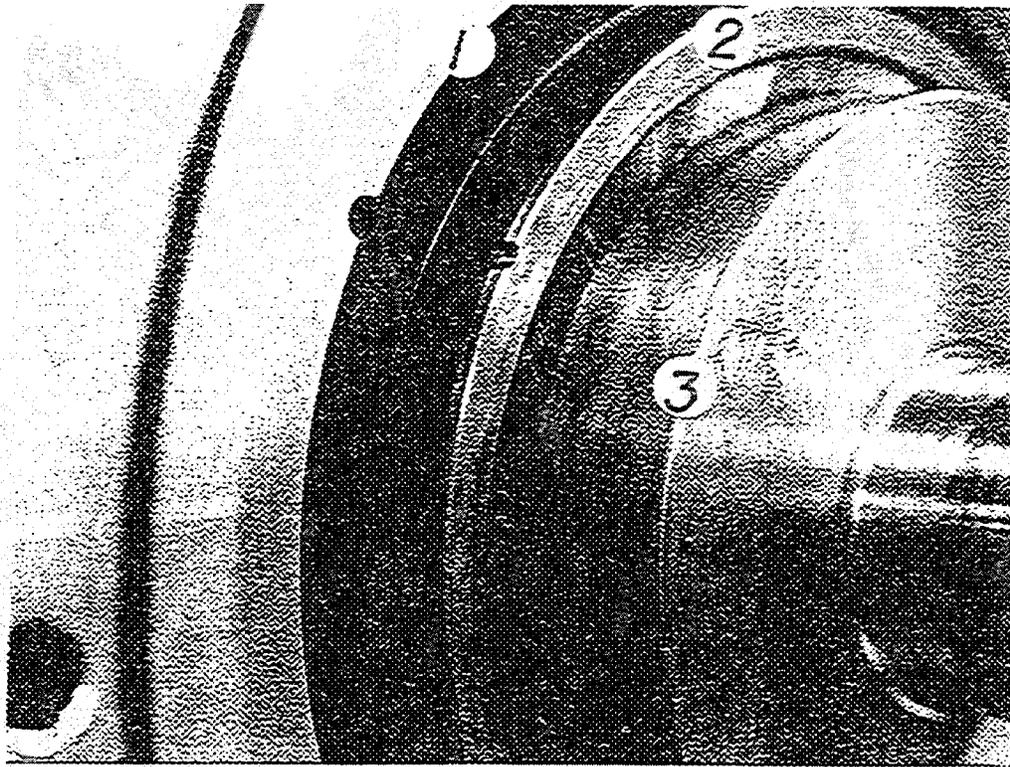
B Shaft/Brush/Spiral Groove Housing Assembly
